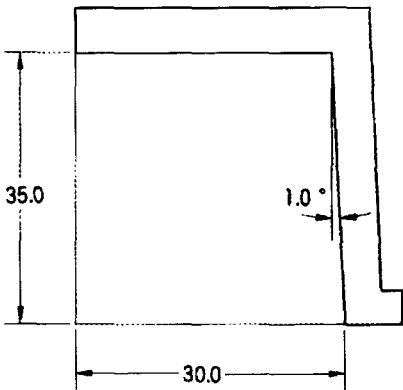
Geometry of forming tool for rectangular box.(unit:mm)
